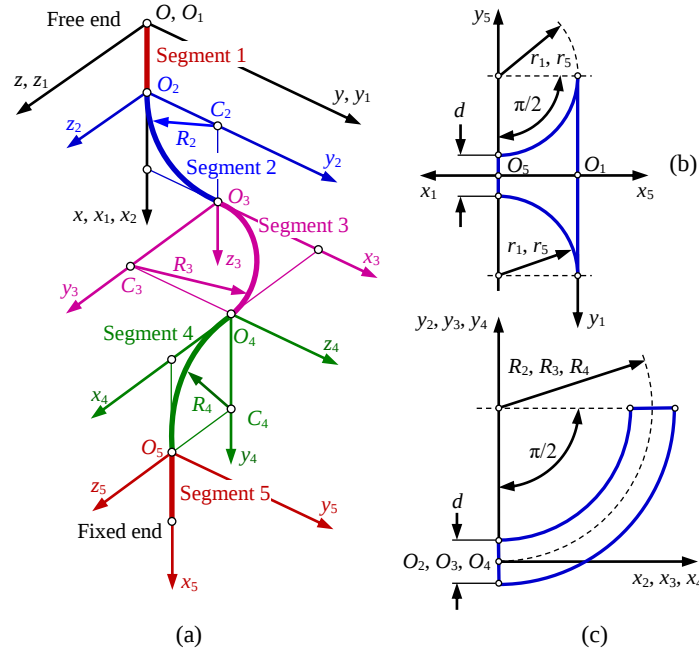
(a) Skeleton representation of the 3D Cartesian serial flexible hinge; (b) Side view of straight-axis segments; (c) Side view of circular-axis segments.
